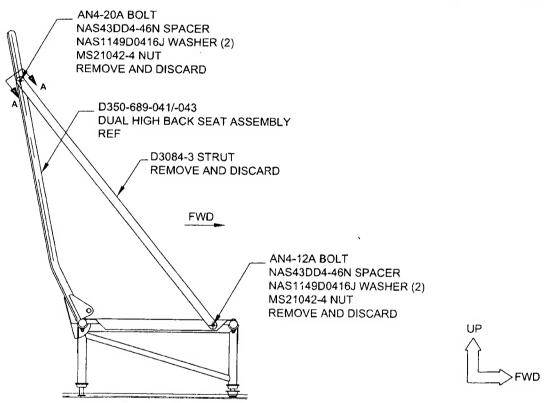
Removal of D350-689-019 Control Guard Kit
